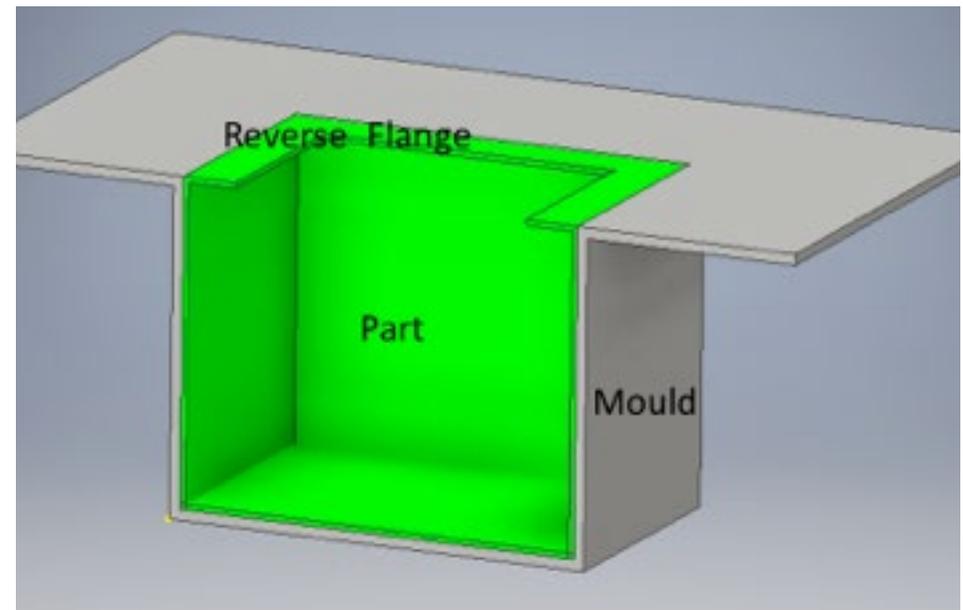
Shows a cutaway of the Part in better detail after removing the Countermould and Form Blocks.
